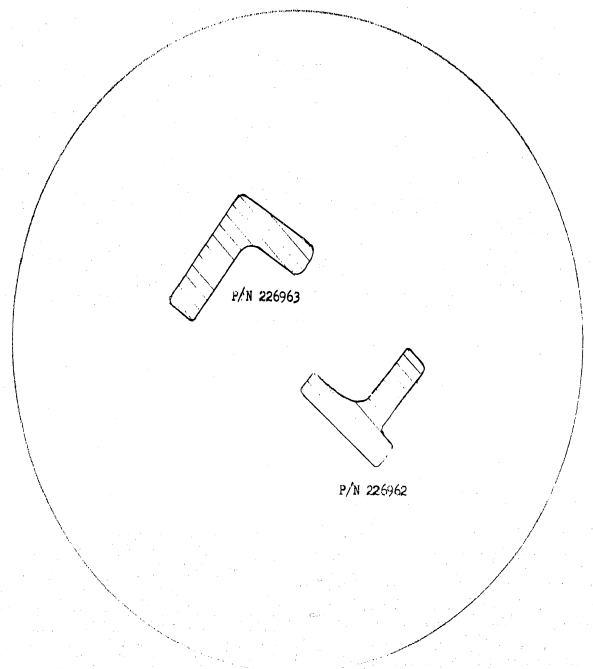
SCHEMATIC DRAWING OF THE MULTI-OPENING DIE FOR THE EXTRUSION OF P/N'S 226962 AND 226963
